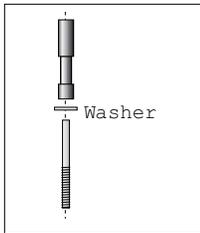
Adjusting Gate Assembly for Low-Tension
